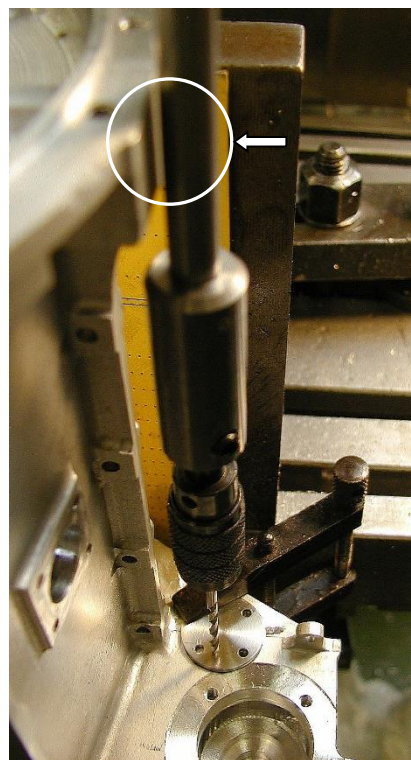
The Drill Cannot Be Positioned Correctly Because Of The Overhanging Bell Housing
